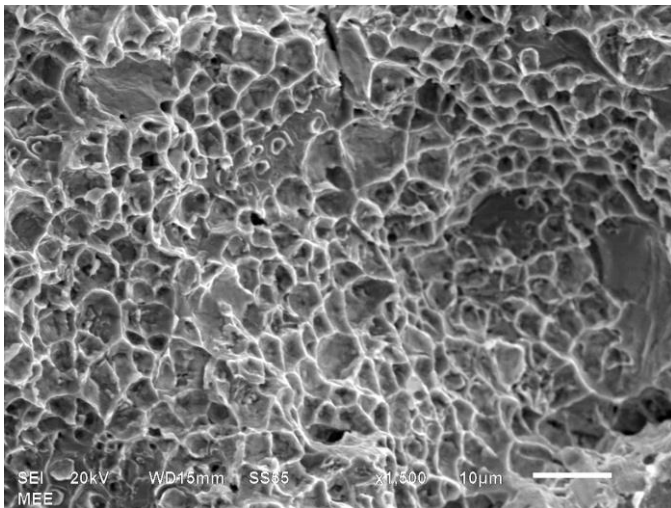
1500X Fracture Surface of Fitting 1
